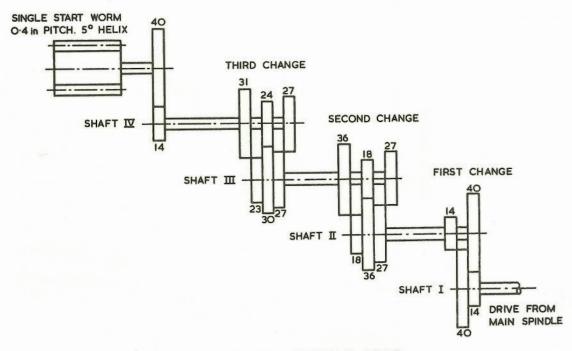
DIAGRAM SHOWING SHAFT & GEAR ARRANGEMENT IN GEARBOX.
